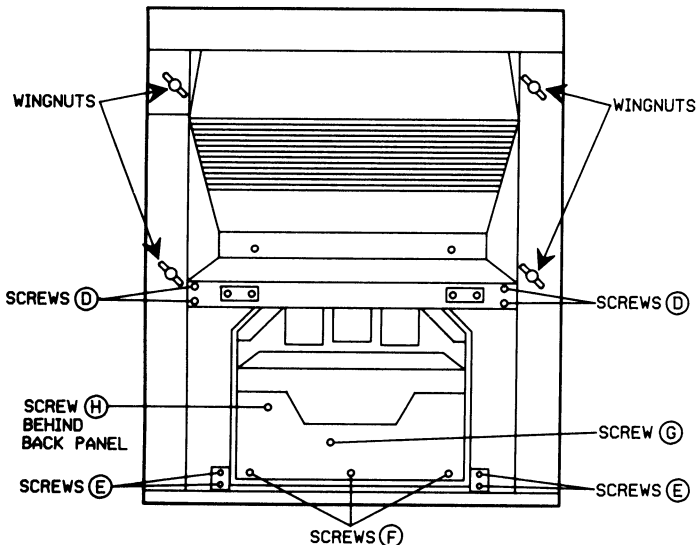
Cabinet Rear View (Back Cover Removed) (46GW940/951/952, P46101/130/151/159/160, P52151/152, P60152/153)
